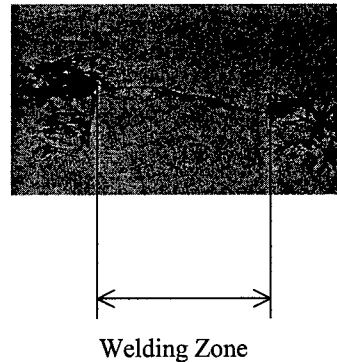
Shape of fatigue crack around welding zone.
